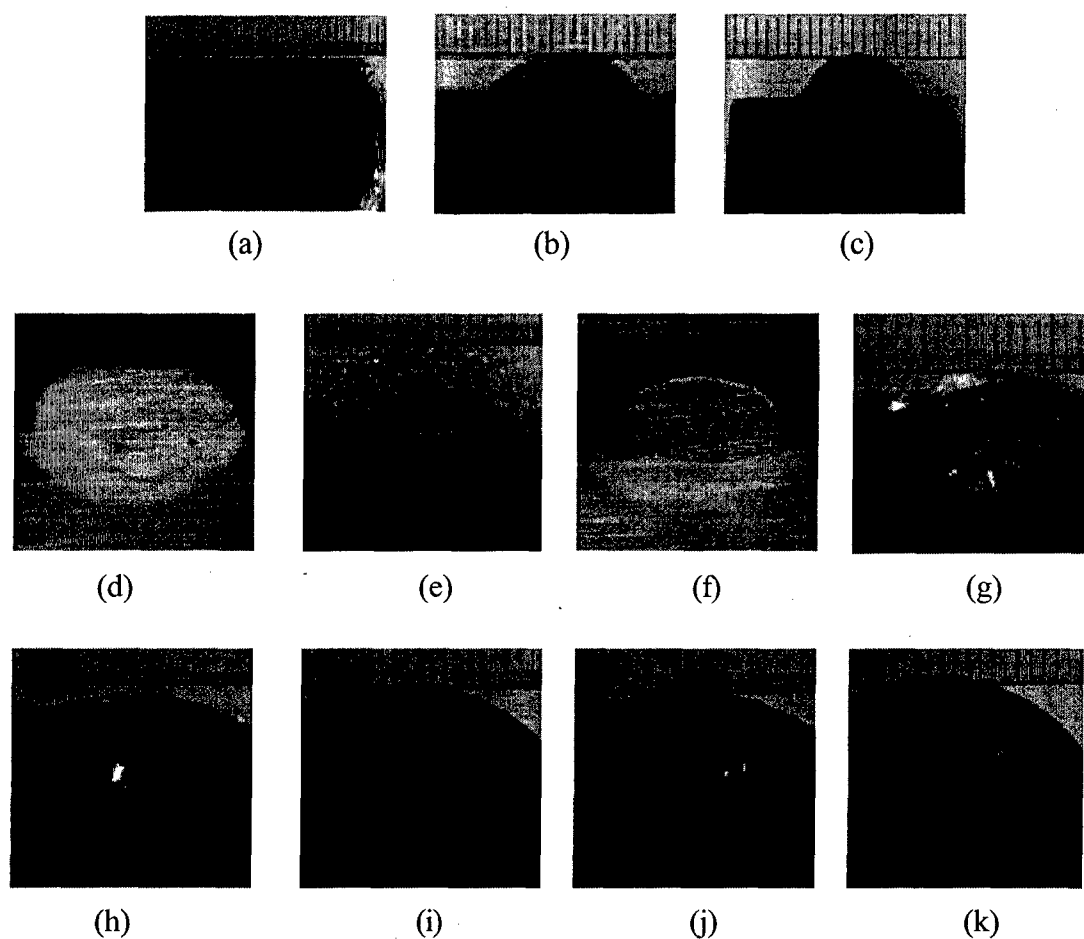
Representative photographs of cross sections of bead-on-plate welds produced with the metal-cored, yttrium-containing consumables (a) 0-1-C, (b) 0-1-D, and (c) 0-2, and welds produced with (d) 1-1-C, (e) 1-1-D, (f) 1-2-C, (g) 1-2-D, (h) 1-3, (i) 1-4, (j) 1-5, and (k) 1-6 showing significant increases in porosity and contact angles with increasing fluoride additions.
